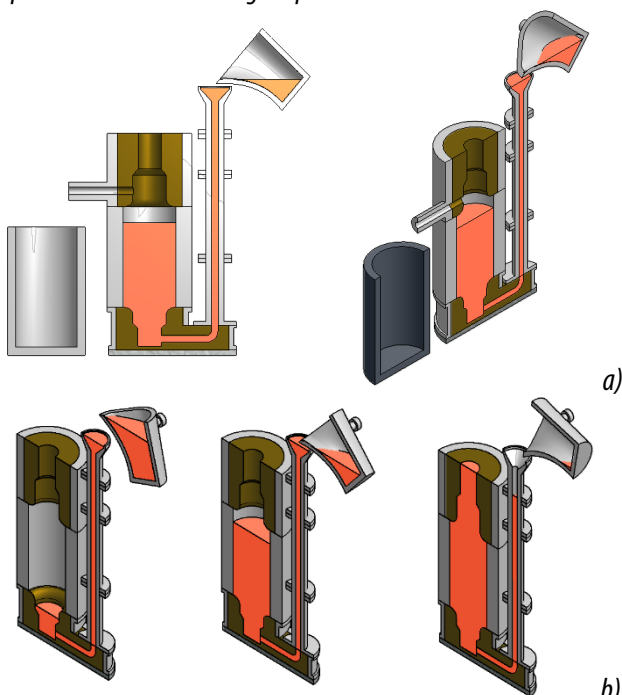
The of the rolling mills rolls casting technology: a) the casting equipment; b) the casting phases
